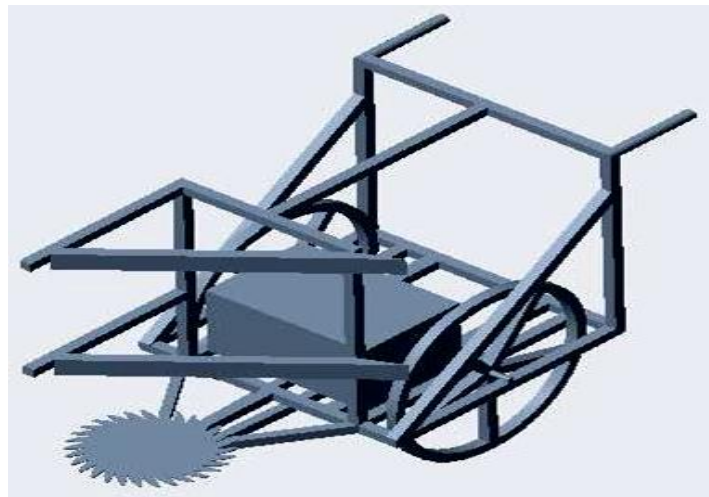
Three Dimensional Model of a Proposed Sugarcane Harvesting Machine
